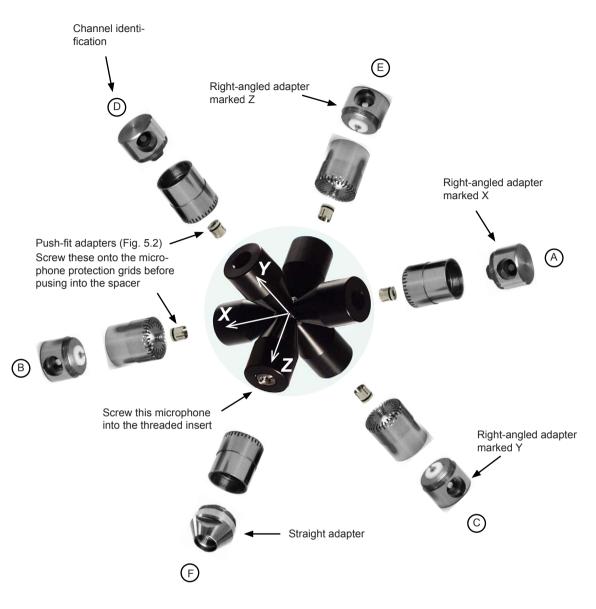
Exploded view of probe assembly (for clarity preamplifiers not shown). Notes:
